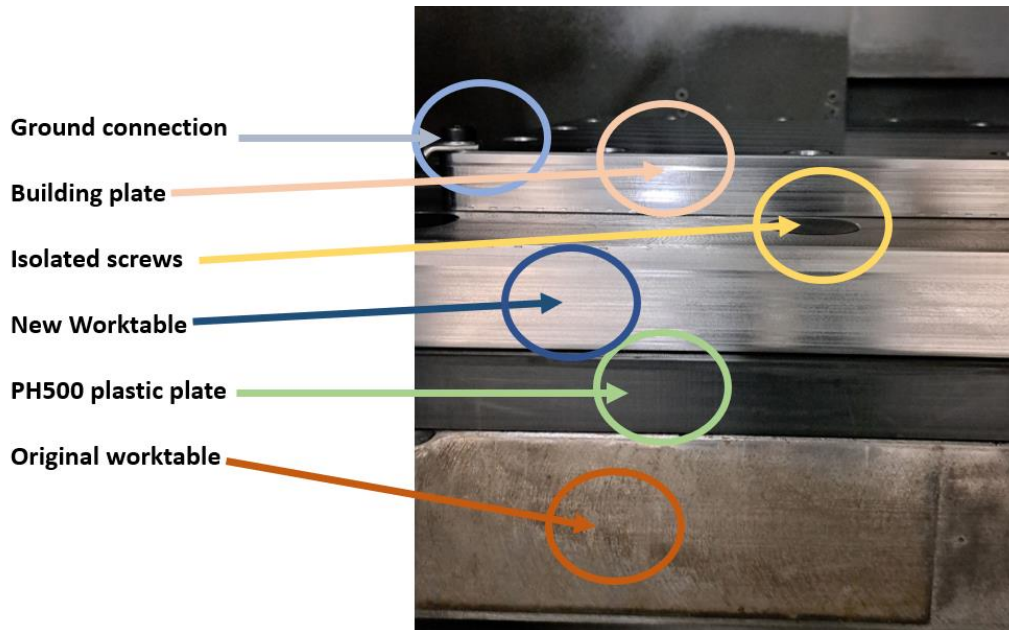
Isolating the CNC center from the welding through a new build with plastic in between.
